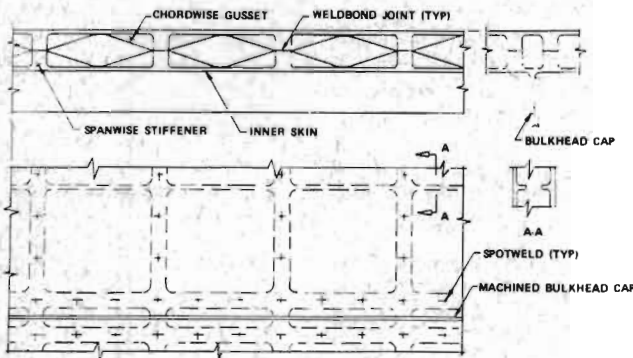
INTEGRALLY MACHINED SANDWICH
